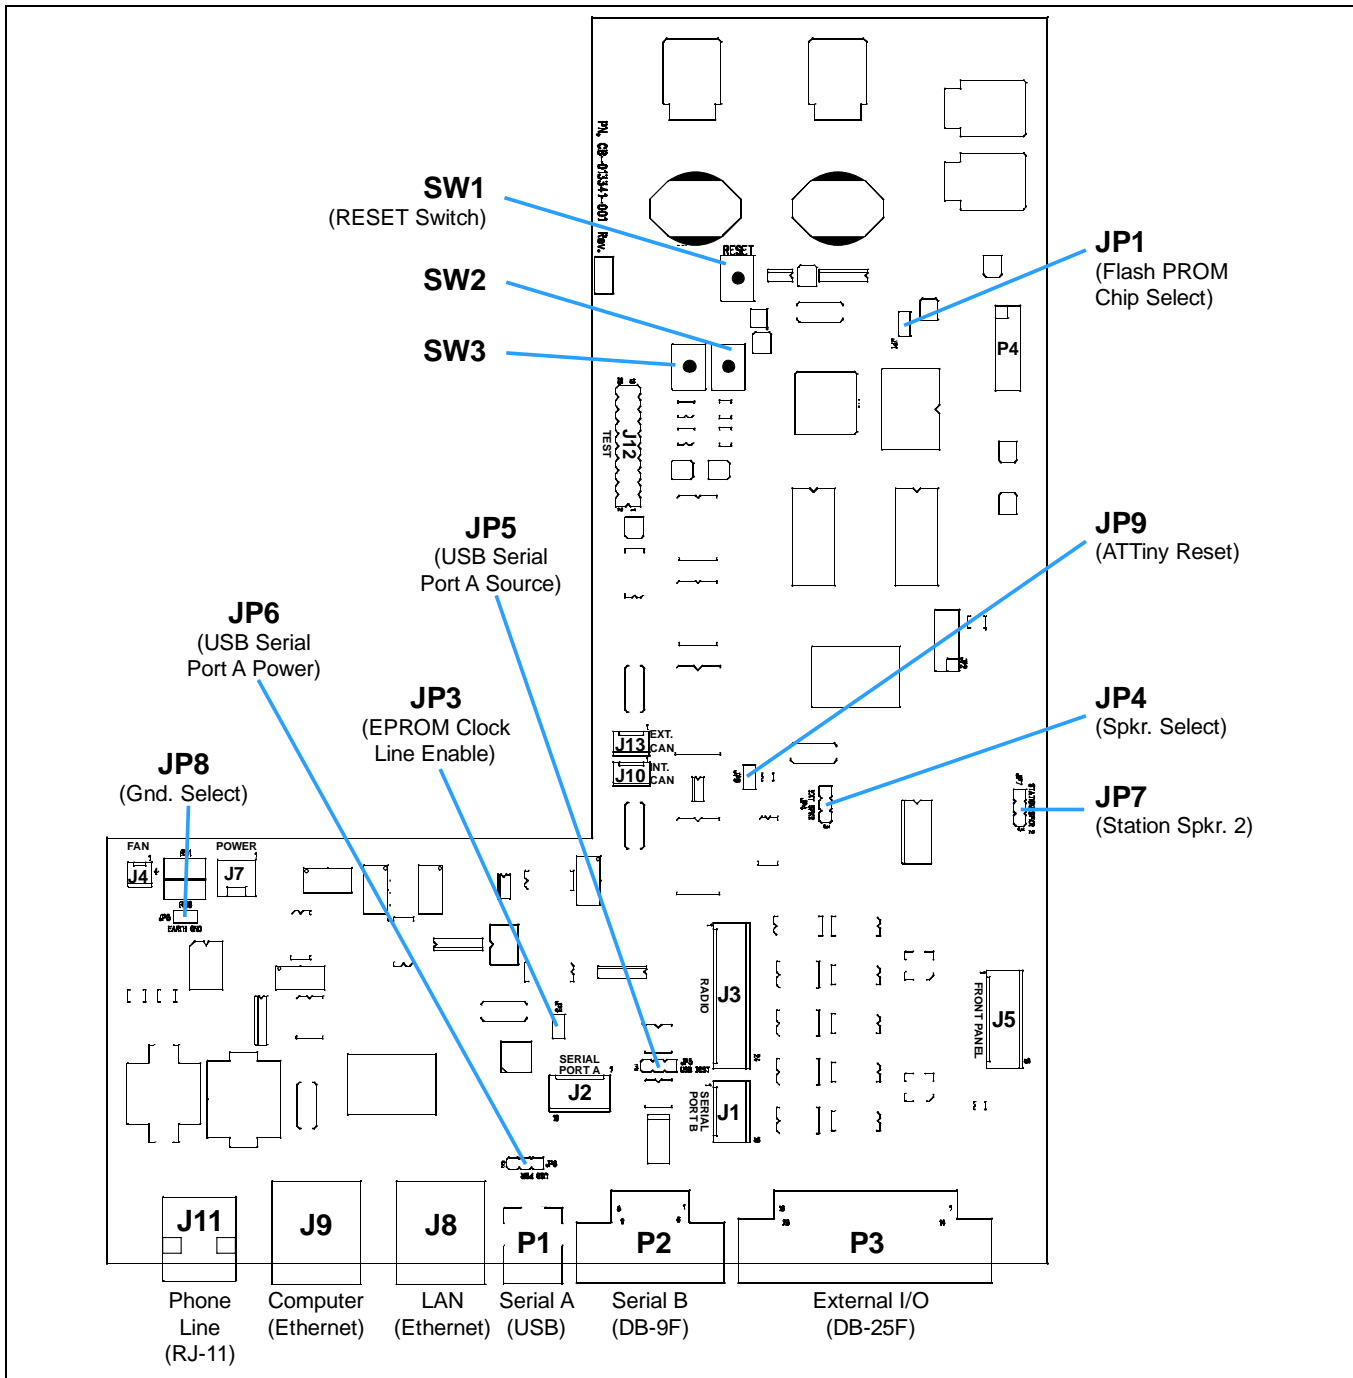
Remote Control (Plus) Board – Jumpers, Connectors/Jacks and Switches
